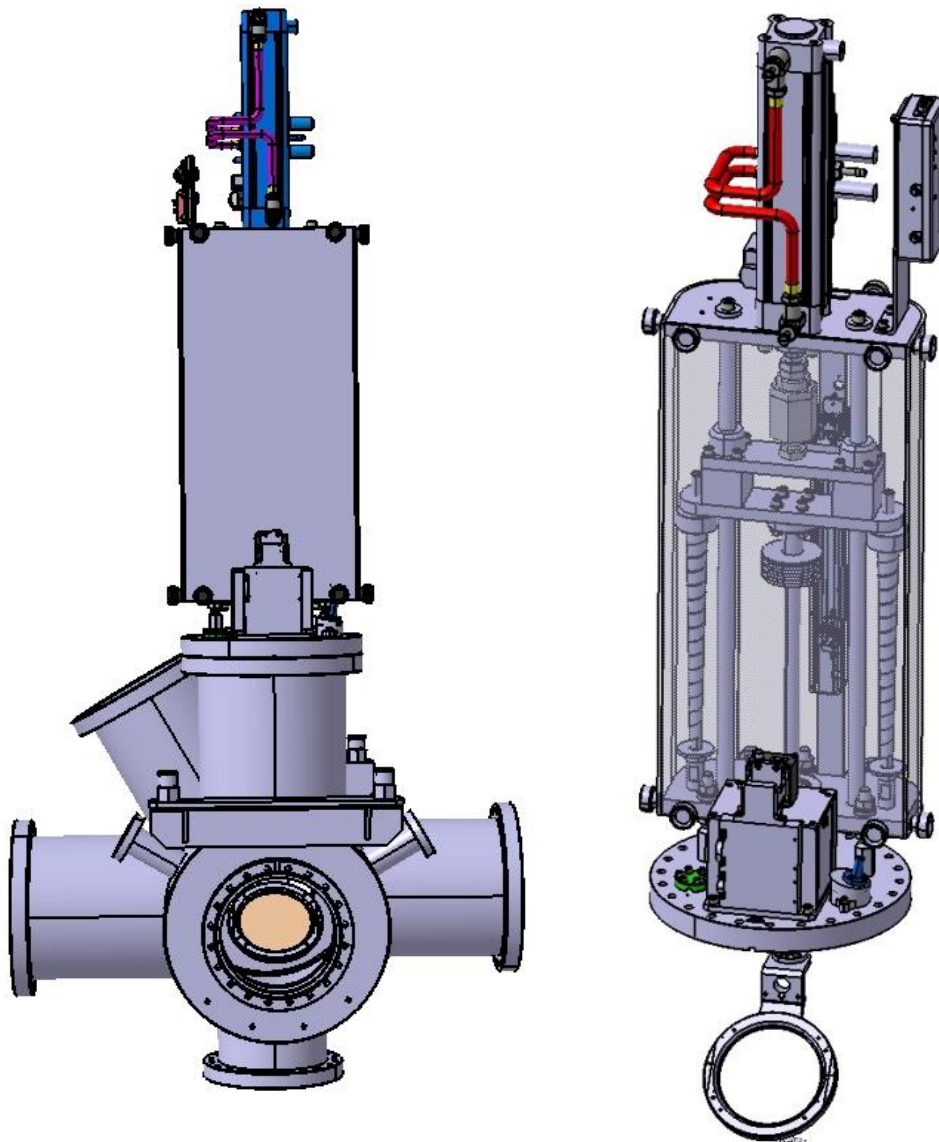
3D model for prototypes of vacuum chamber and mechanics for HEBT scintillating screens.
